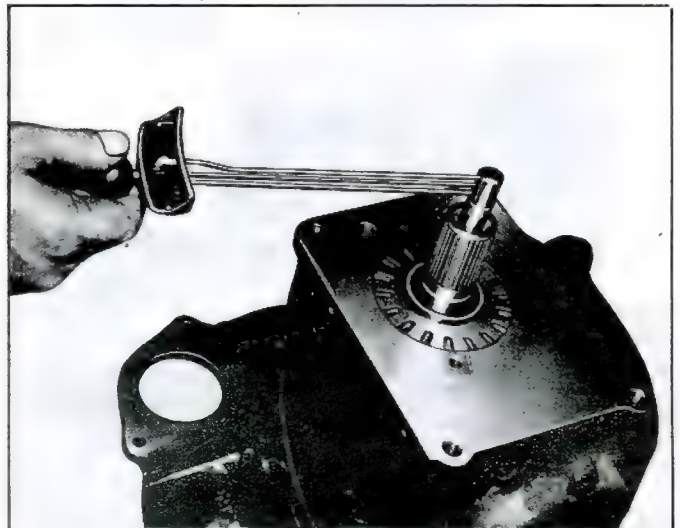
Measuring Pinion Turning Torque Using J-8362 Adapter and Torque Wrench J-5853
